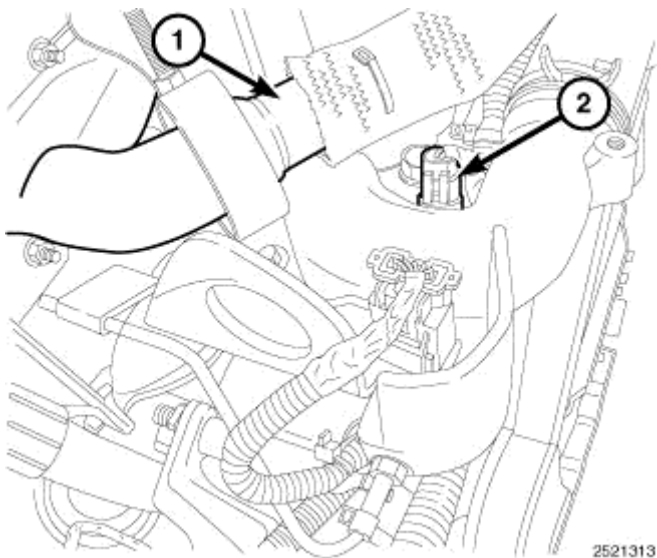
Engine Coolant Temperature (ECT) Sensor & Thermostat
